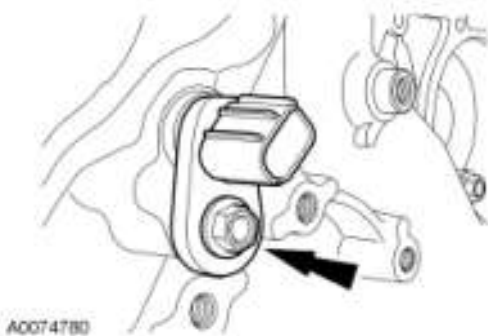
Locating Camshaft (CMP) Sensor Bolt
